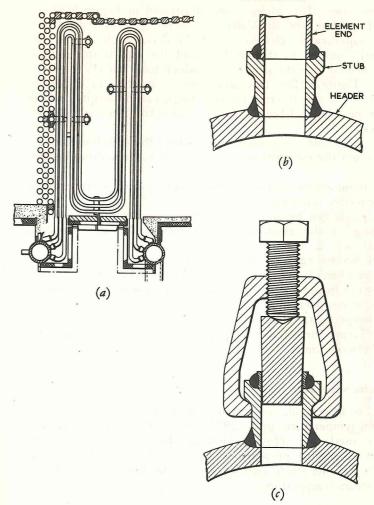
Melric joints applied to the superheaters of a Babcock & Wilcox selectable superheat boiler
